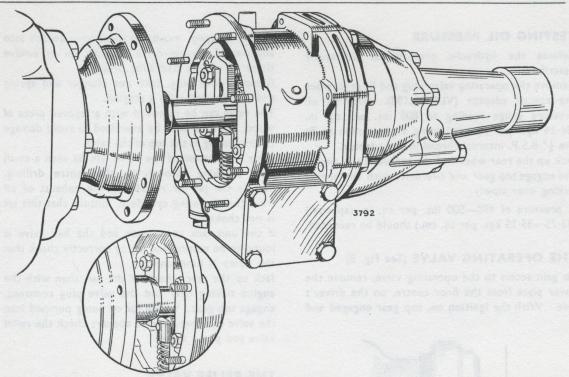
Overdrive ready for fitting to gearbox (Later units are fitted with an external balance pipe and a plug replaces the breather)
